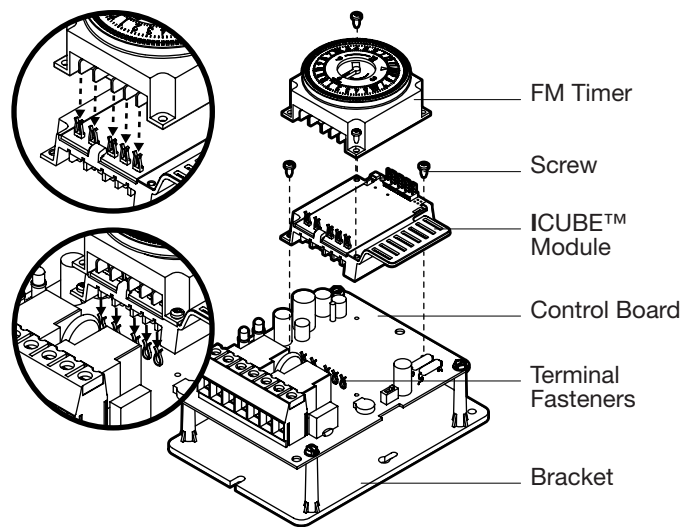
Install the ICUBE™ Module (Bracket Shown)
